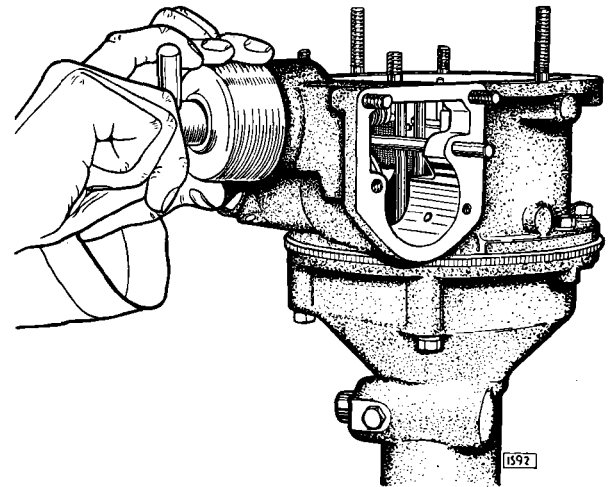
Extracting the oil pump (Tool No. L.183A).
